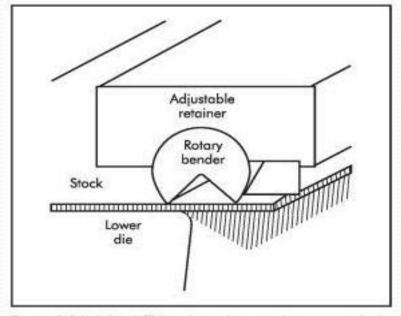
A Ready[™] bender makes initial contact with the stock. As the die closes, the bender clamps and bends the stock. (Courtesy Ready Tools, Inc.)
